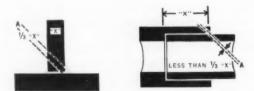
A fillet will add strength to a joint only when dimension (A) approaches 30 per cent of dimension (X). T-joint (left) will benefit from a fillet, while tubular joint (right) will not.
